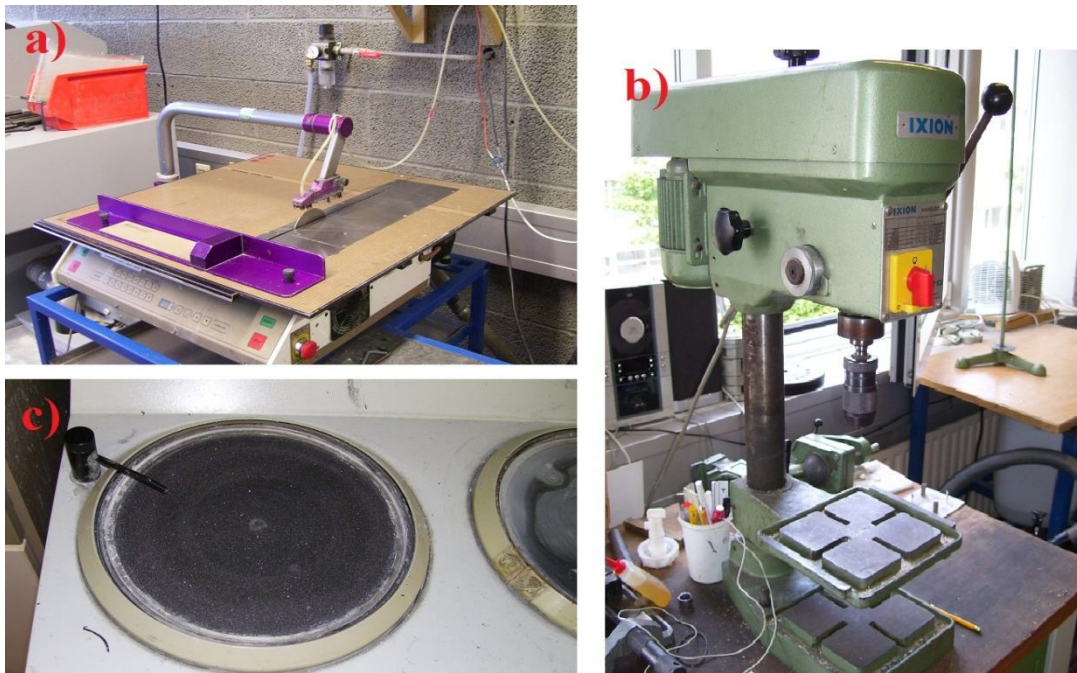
Machines employed for manufacturing the specimens: a) disc saw; b) vertical drilling machine; c) wet grinder.
